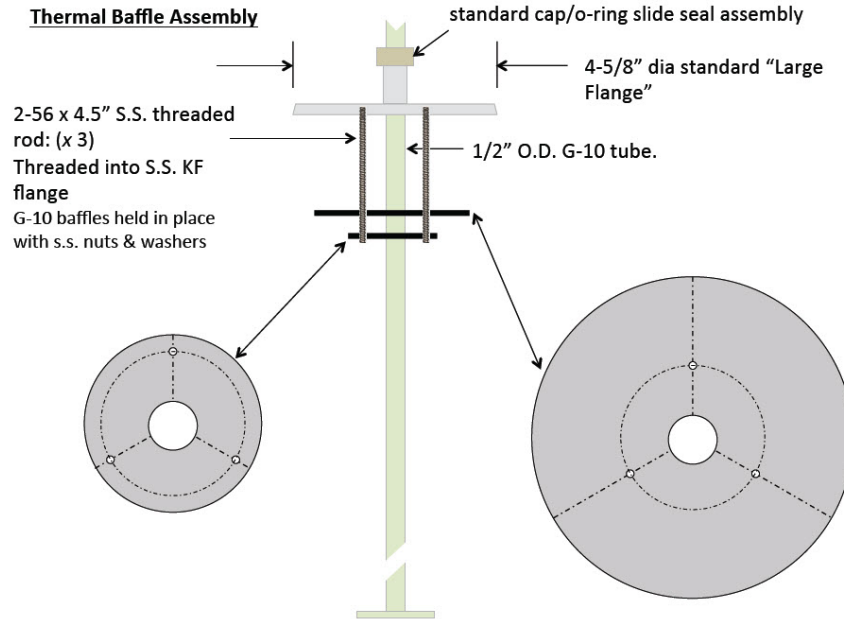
Details of the thermal baffle assembly, slide seal, and s.s. flange sections of the RF probe.
